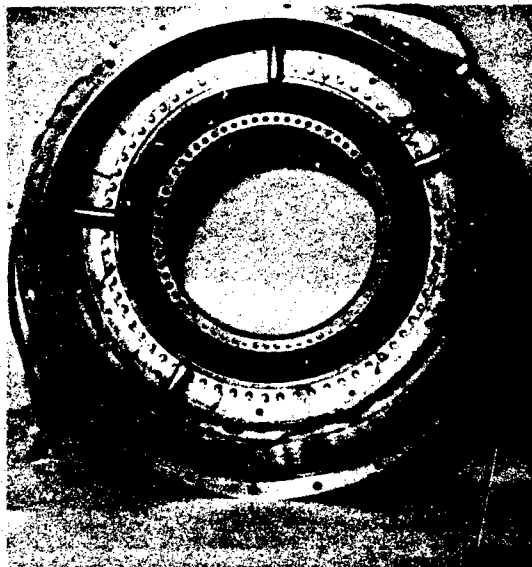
Build I, Full Front View of First Nozzle Assembly (XPN-18127)
